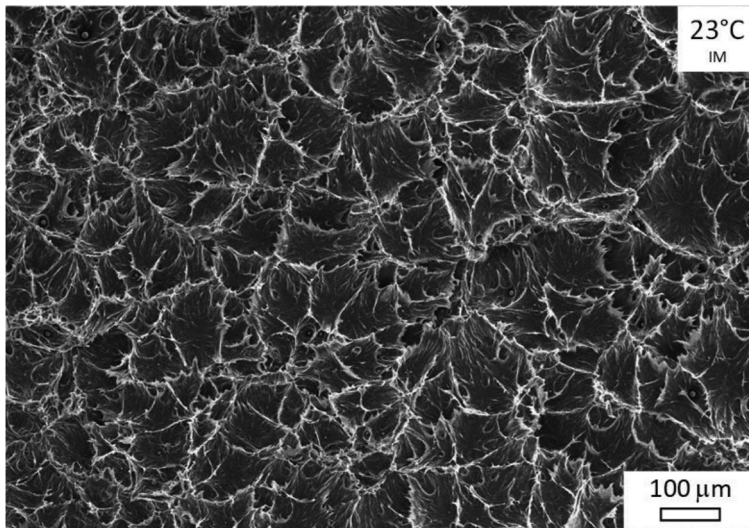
shows the fracture surface of IM PA-12. In this case, the patch-work pattern is much finer and more homogeneous than that observed in SLS PA-12 (Figure 5-25 and Figure 5-26), and what is more, the fracture surfaces were free of unmolten particles or defects.
